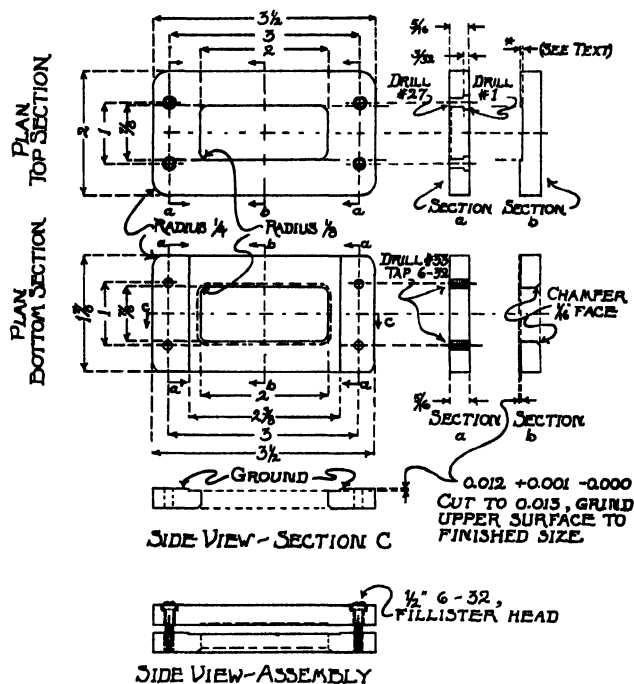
Working drawing of the microtome. All dimensions are in inches
